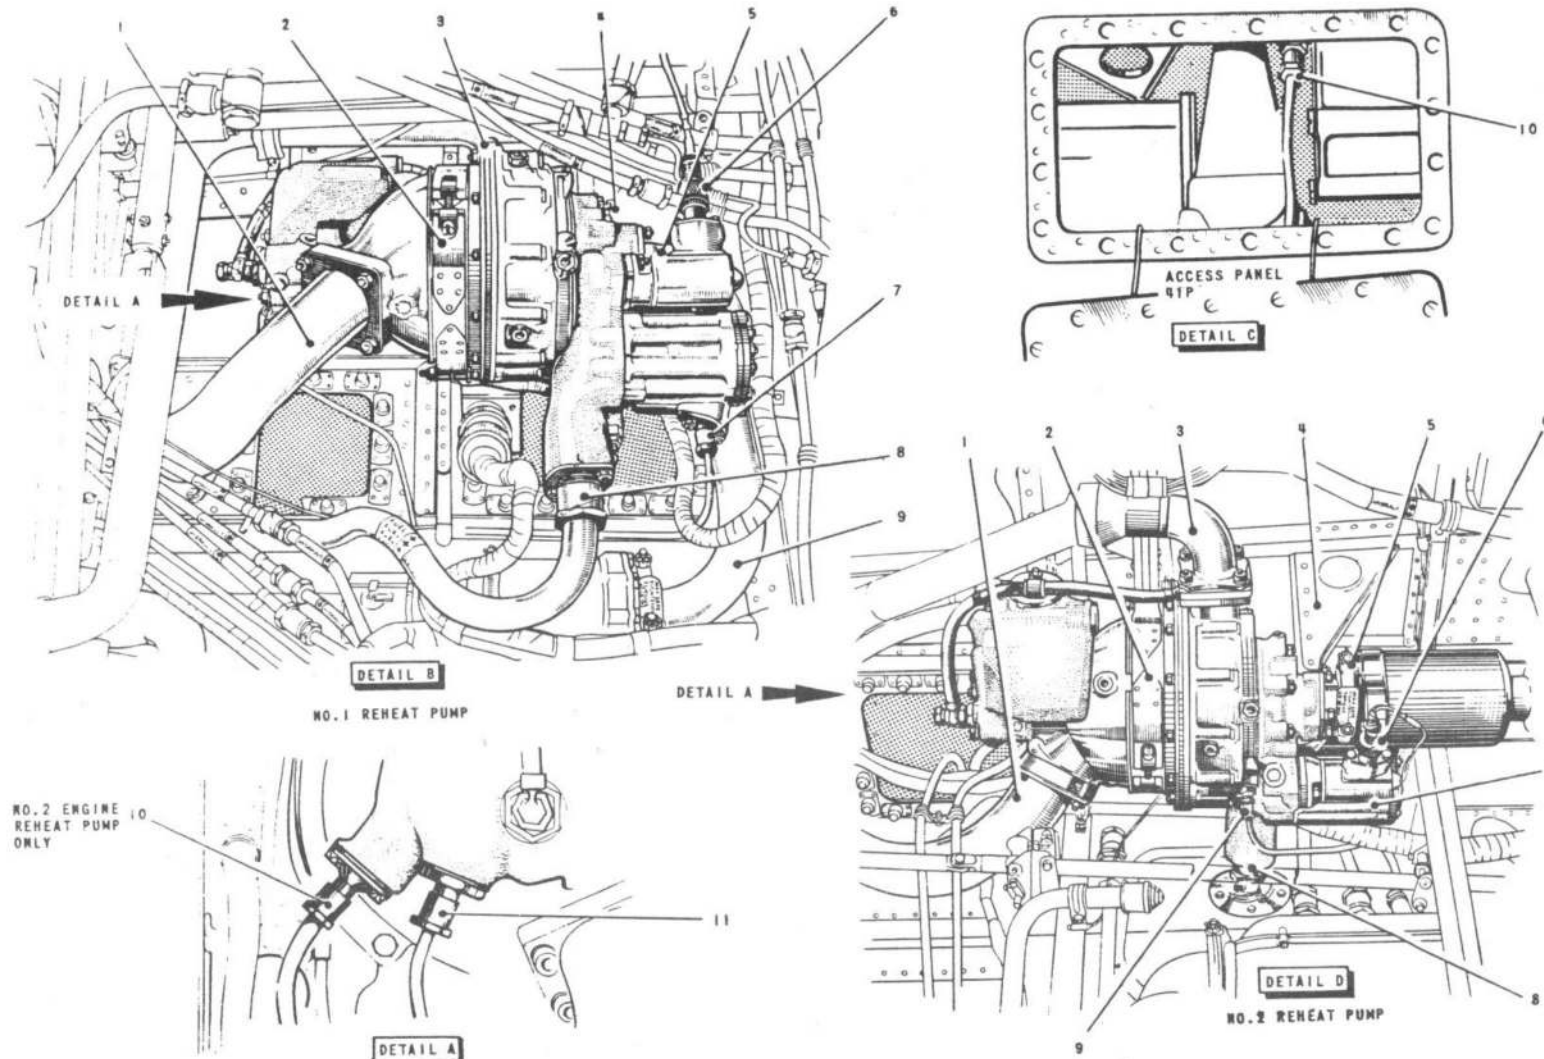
REHEAT PUMPS-REMOVAL AND ASSEMBLY
